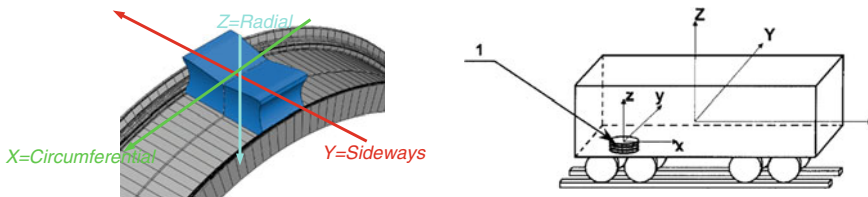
Sketch of one rubber block mounted on the wheel inner tire
